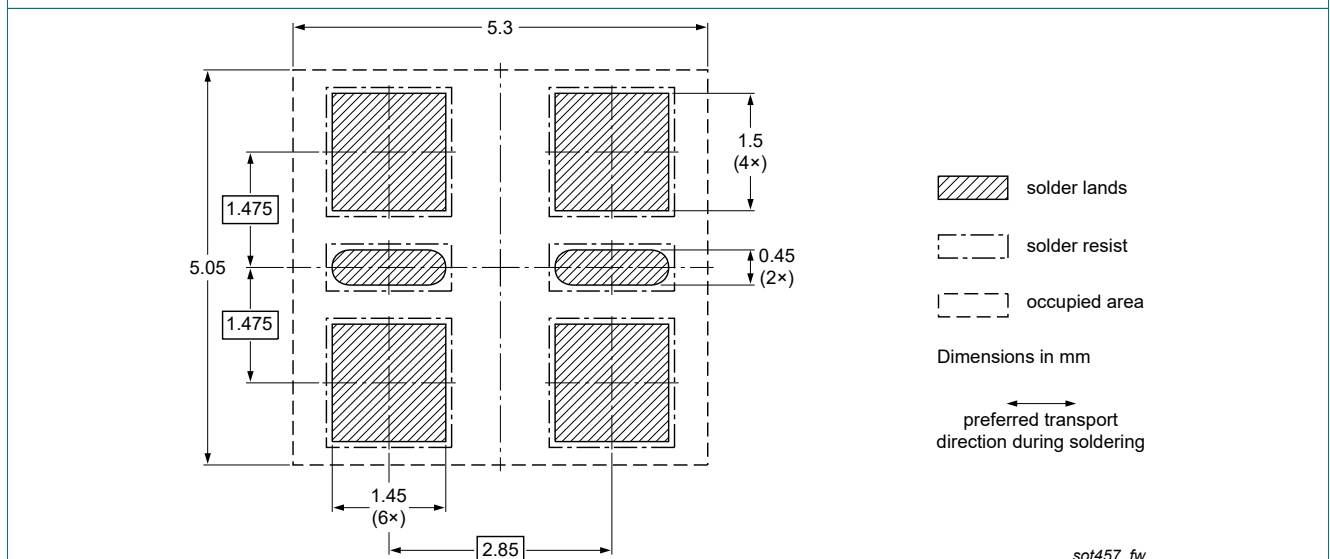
Wave soldering footprint for SC-74; TSOP6 (SOT457)
